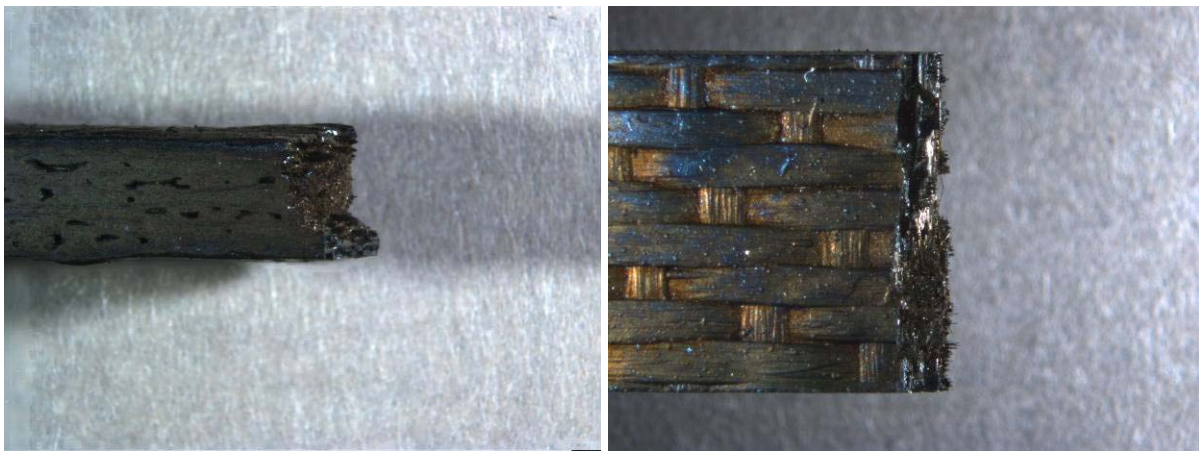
Optical Micrographs of the fracture surfaces produced in tensile test to failure conducted at 0.05mm/sec at 1200 °C in air on specimen P1-3.
